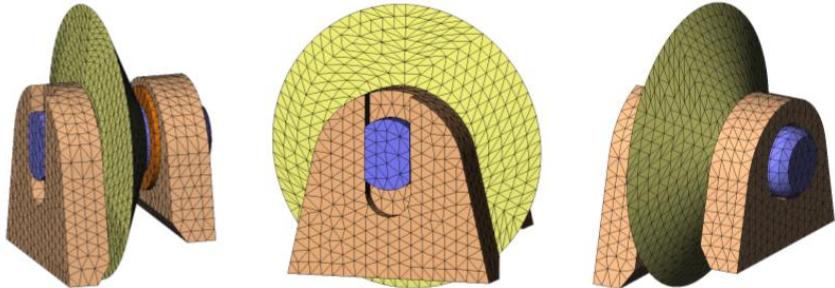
Finite element model of a double-seats knot fastening disk tool
